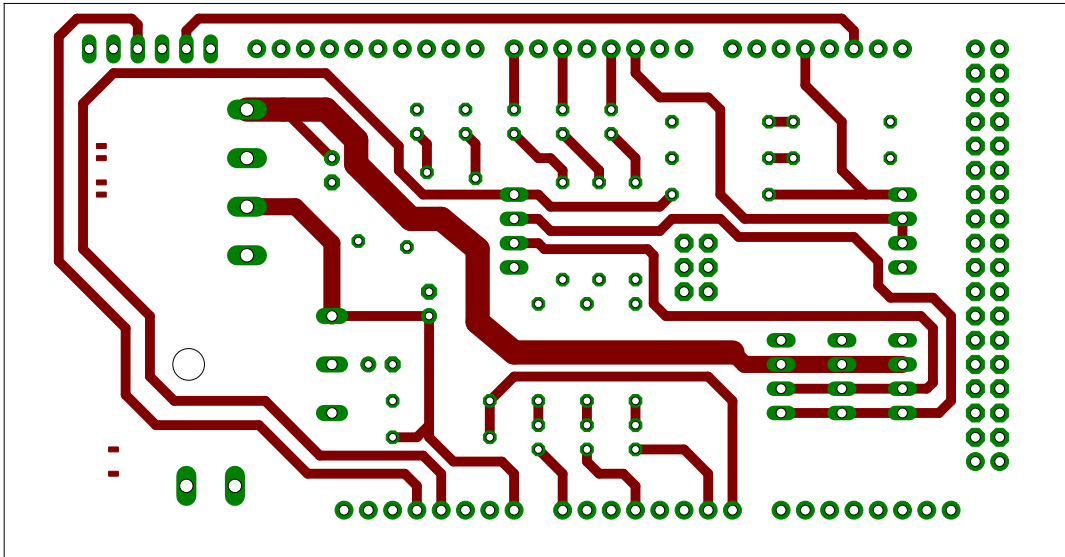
Top copper layer the PCB of the Arduino shield.
